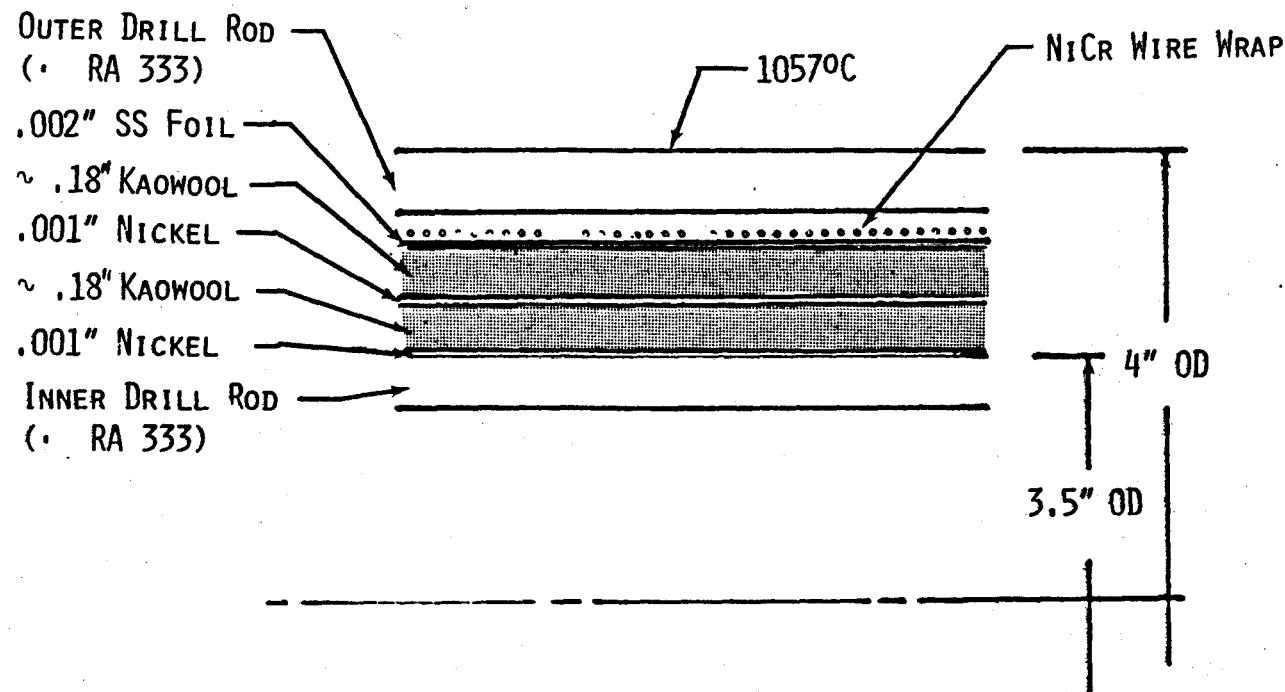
INSULATION SECTION INSULATED DRILL STRING
